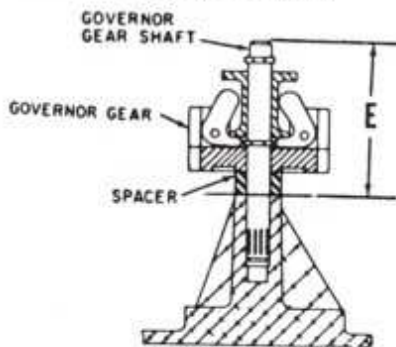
Governor gear and shaft installation on Models VH70, VM70, VM80 and VM100. Dimension (E) is 1-19/32 inches (40.5 mm).
